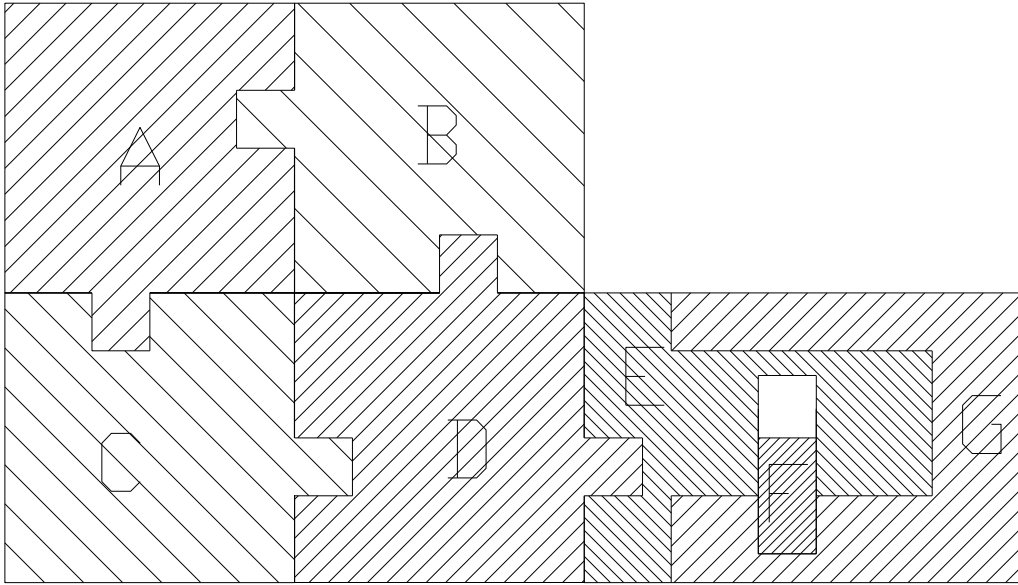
A product that can be assembled with a C-S-NL-NM assembly
